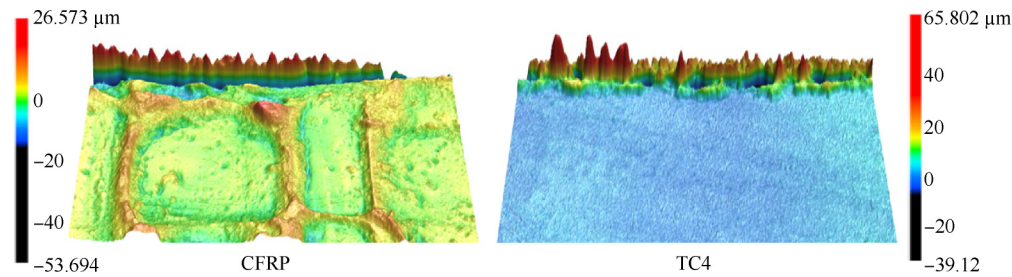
Three-dimensional imaging of CFRP and TC4 interlayer burrs.
